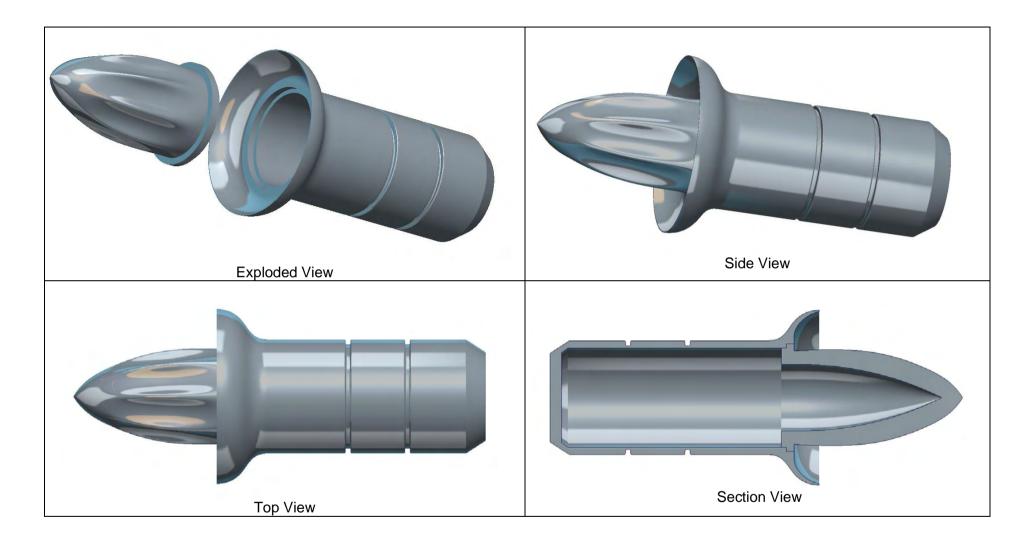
Juice Squeezer 3D CAD for Injection Moulding
